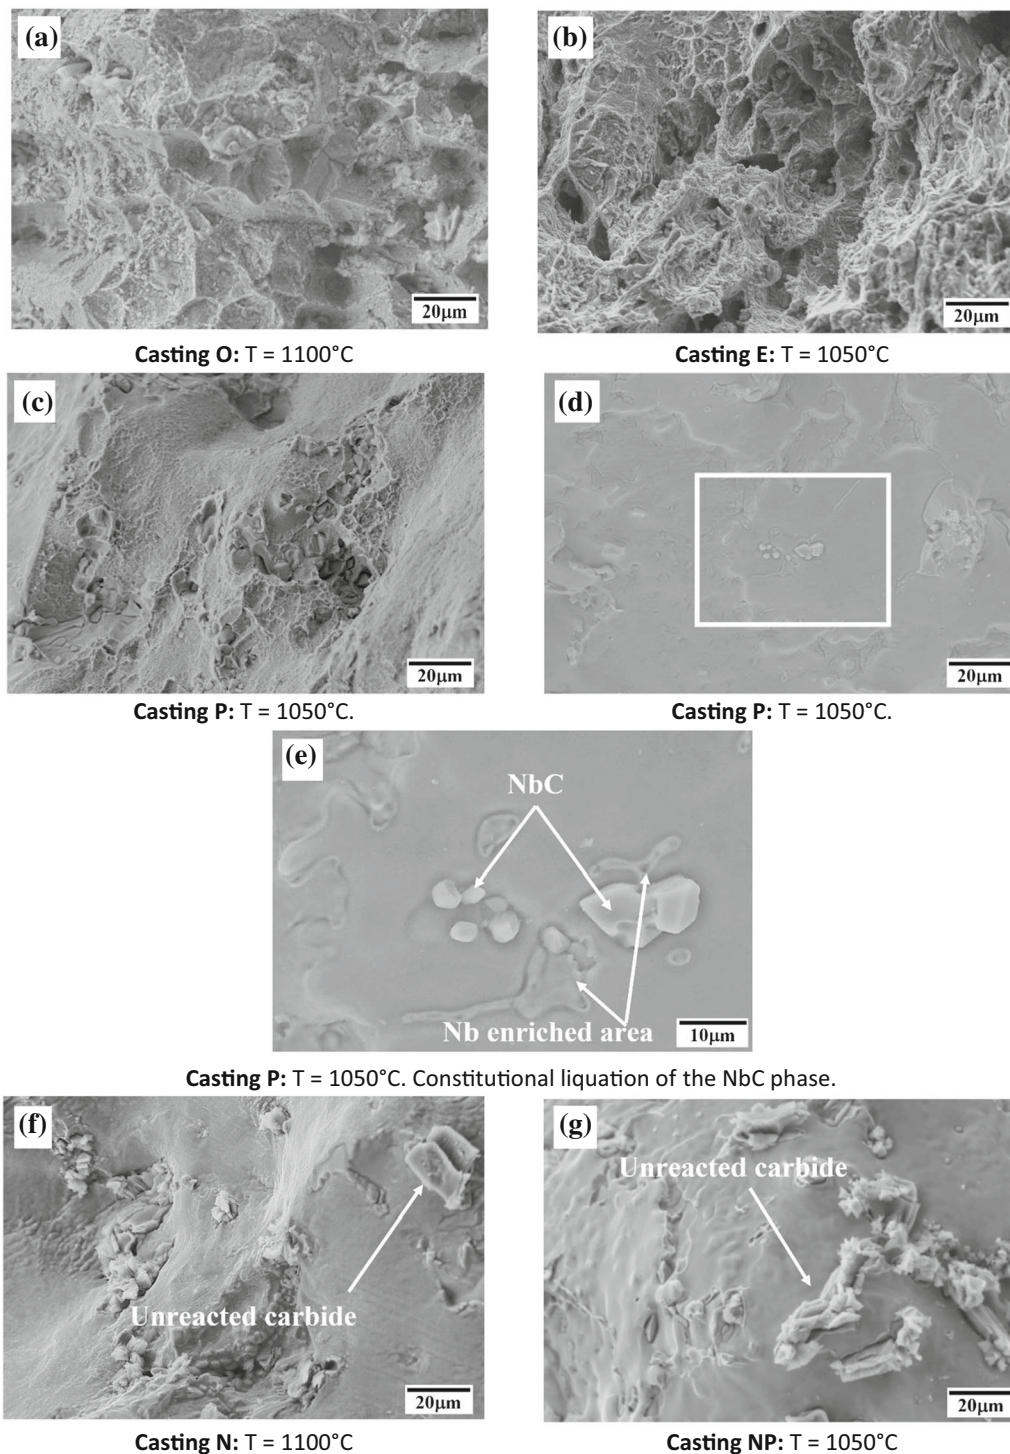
Fracture surface of on-cooling samples (a) casting O, (b) casting E, (c) casting P: area with ductile features (d) casting P, showing area with liquid film present at the moment of fracture, (e) casting P: detail of (d), showing constitutional liquation of NbC with adjacent Nb-enriched areas, (f) casting N, and (g) casting N and (g) casting NP, showing evidence of liquation.
